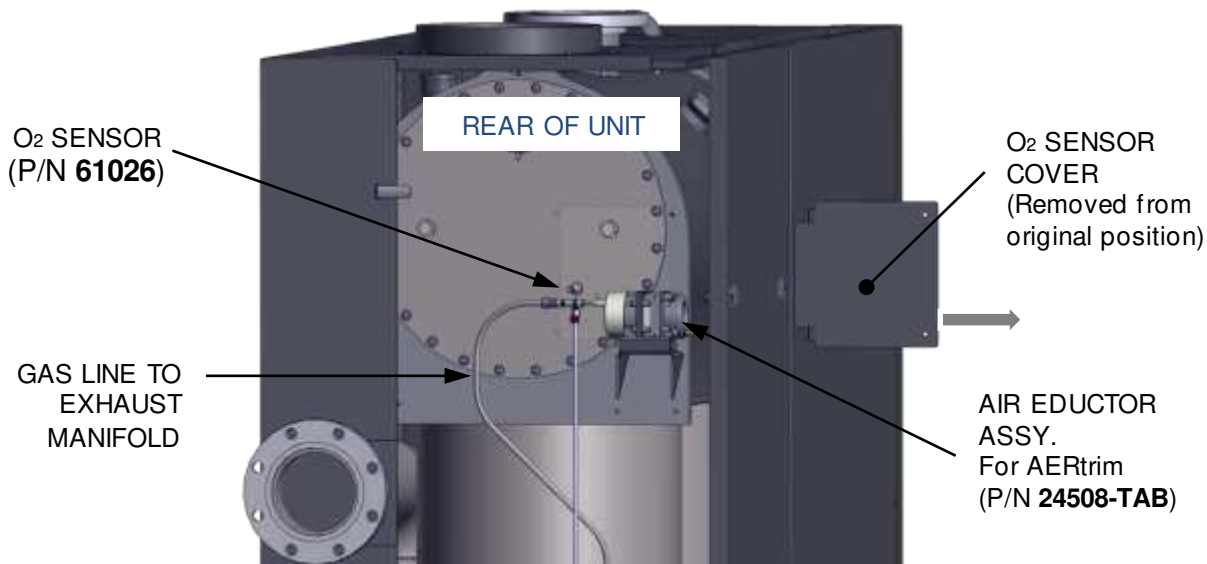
O₂ Sensor Mounting Location – BMK5000 & 6000
